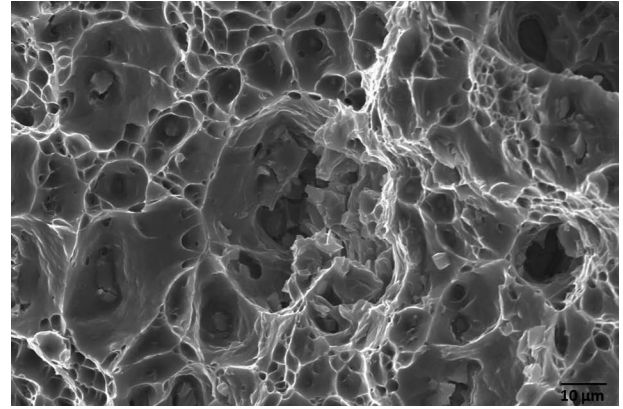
Higher magnified view of fracture surface shown in Fig. 84 revealing clear dimples
